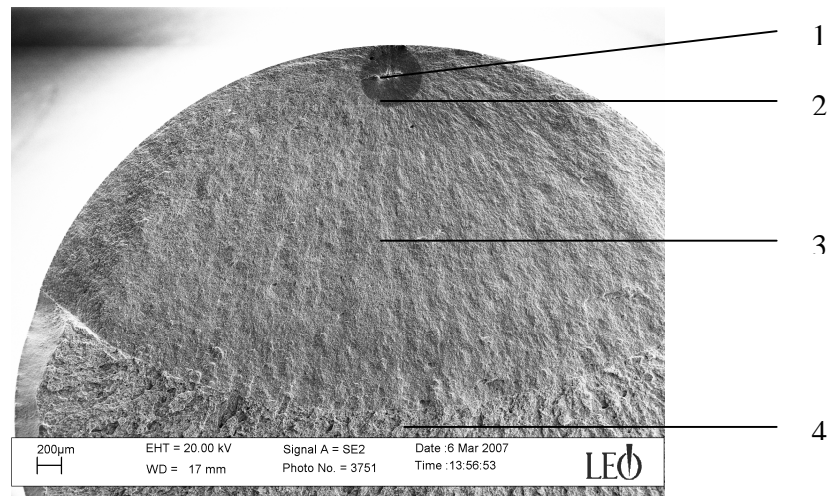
Typical VHCF fracture surface obtained in a specimen made of AISI H13 steel.
